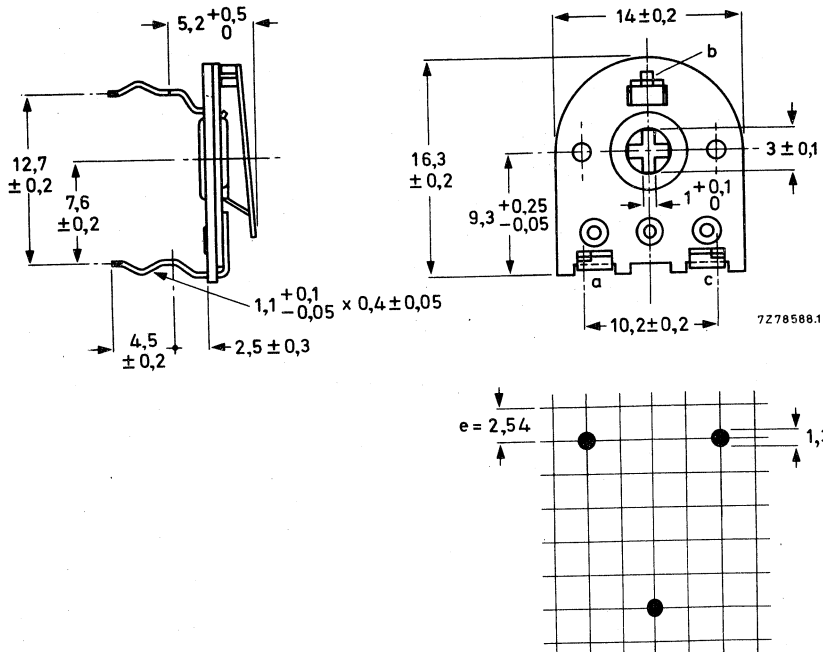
Potentiometer for horizontal mounting, with snap-in printed-wiring pins, 2322 409 033..
